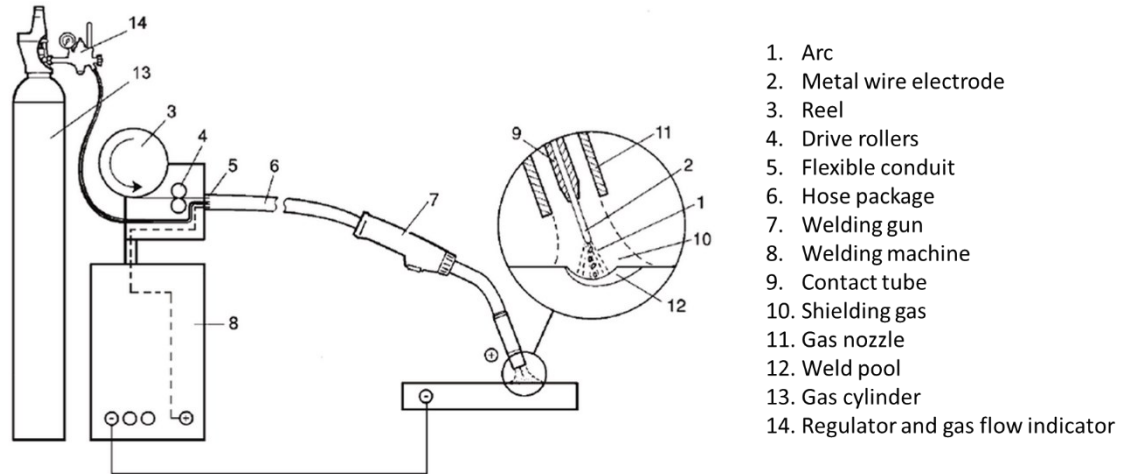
The principles of a MIG/MAG welding setup (Weman 2012, p. 76).
